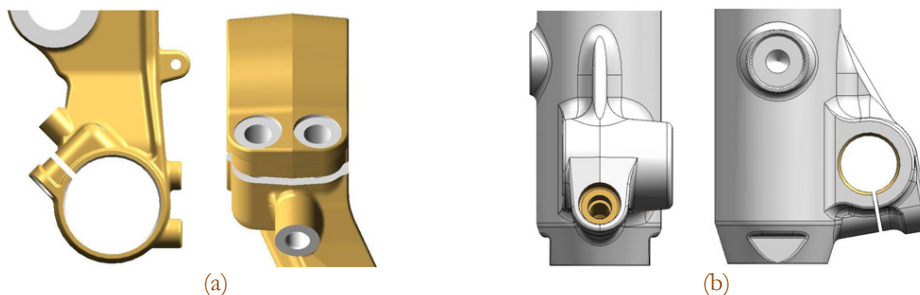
Example of bolted joints in front motorbike suspensions: a) steering plate-leg b) leg-wheel pin.
